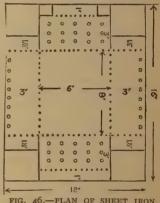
PLAN OF SHEET IRON FOR PAINT REMOVER.
